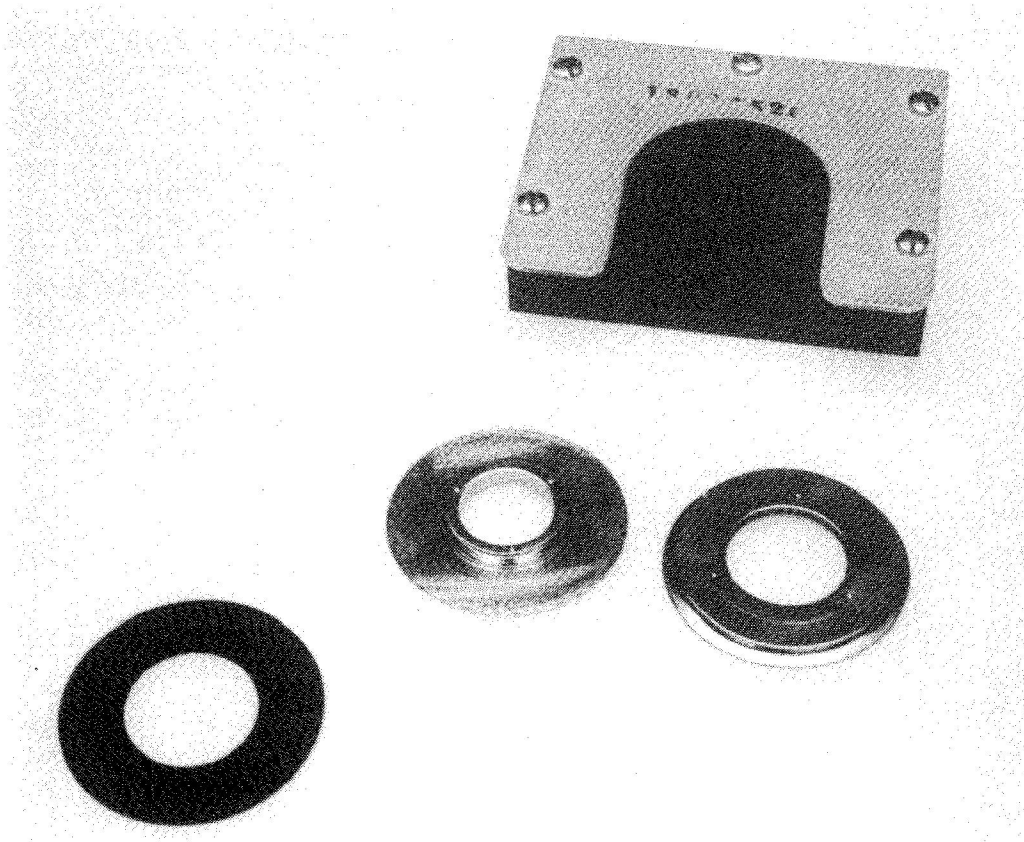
One-inch ID Blade with Adapter and Disassembly Tool
